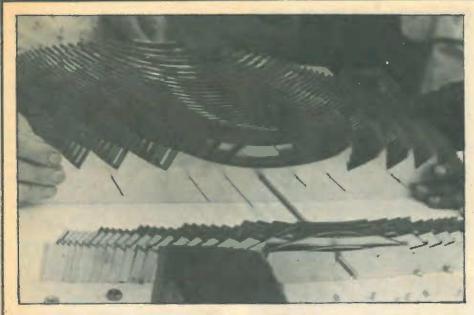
Assembling the aluminium strips on high tensile wires, with spacers threaded on the wires to form the waveguide between strips.
